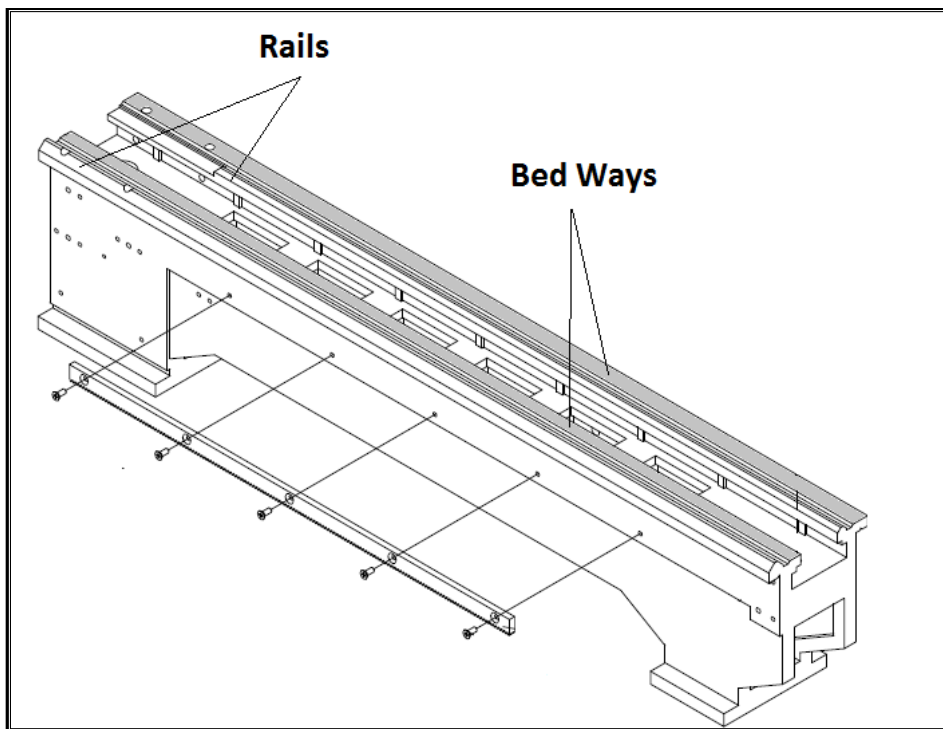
The G0516 lathe bed by Grizzly Industrial Incorporated.
